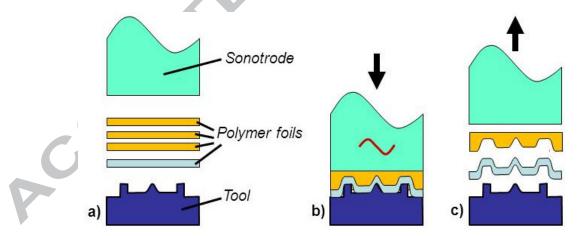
Ultrasonic thermoforming by using two non-weldable polymers.
